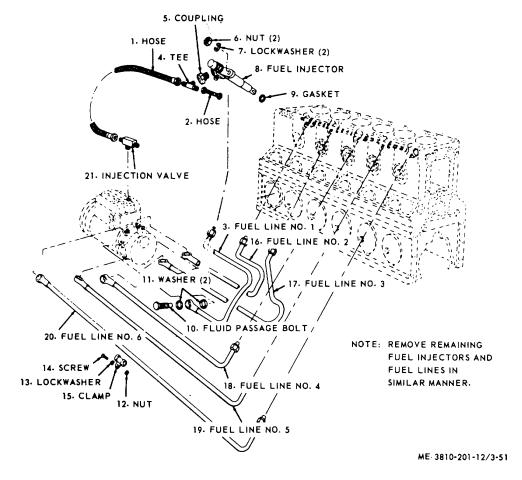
Fuel injector and fuel line removal and installation (engine model 687C-18-ES).
